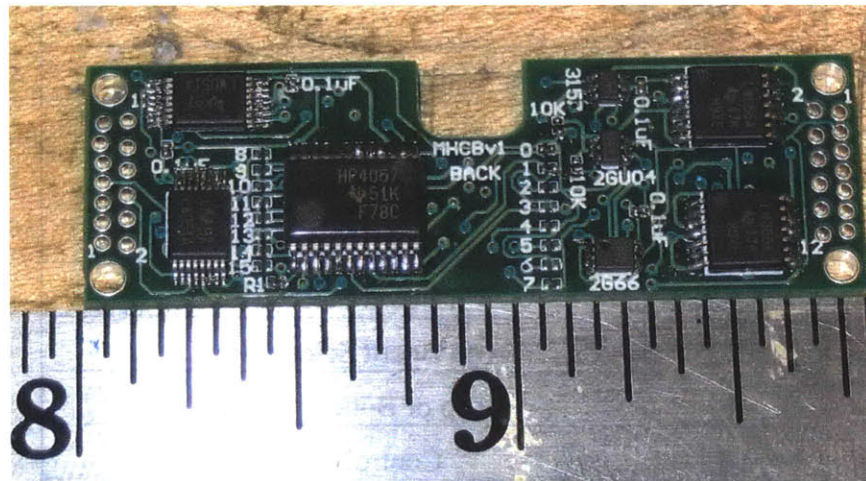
The Bottom of the Mid-Plane Circuit Board.
